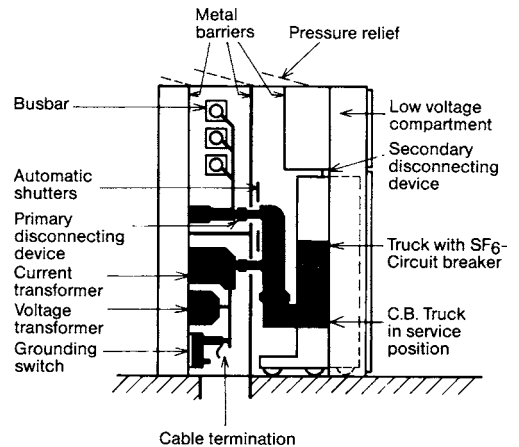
Side view of a 15-kV metal-clad switchgear unit with horizontal-drawout circuit breaker, interchangeable either minimum oil, SF₆ or vacuum design of equal rating.
